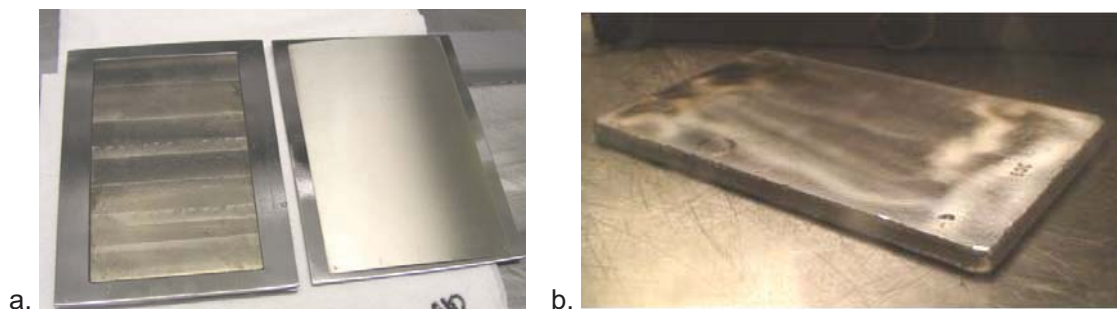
(a) Full size U-10Mo coupon hot rolling assembly lay-up, and (b) welding hot rolling assembly
